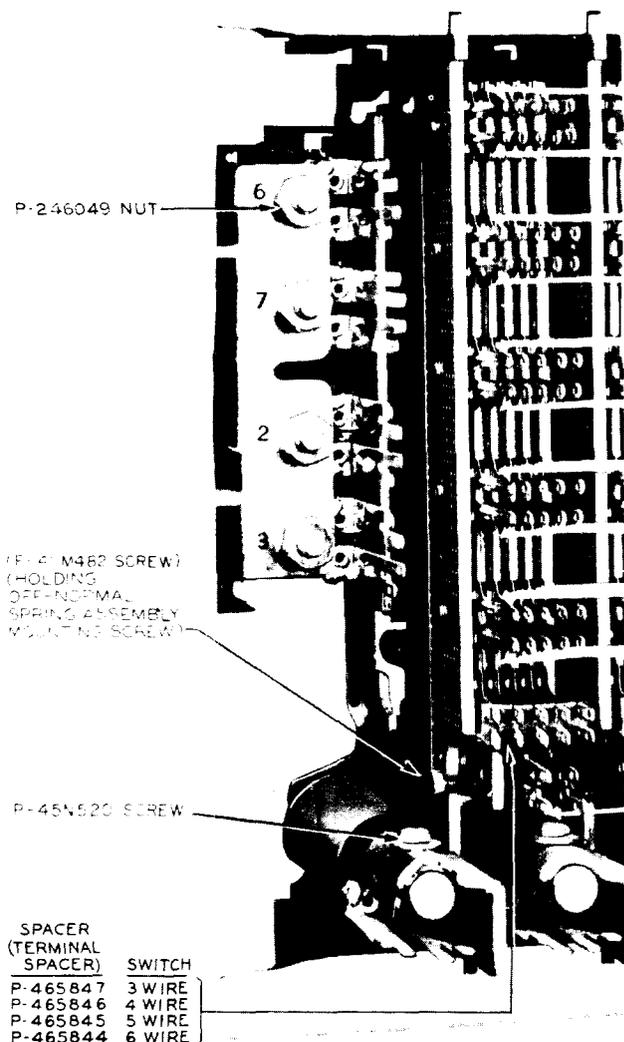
Partial Rear View of Switch Showing Magnet Mounting Parts and Terminal Spacers
